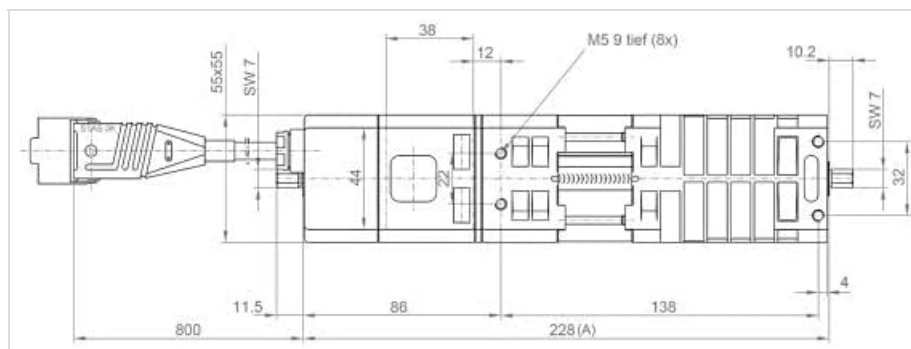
Technical drawing showing dimensions of the elero JA Soft Blind Actuator. This diagram is crucial for ensuring proper fit and installation.
